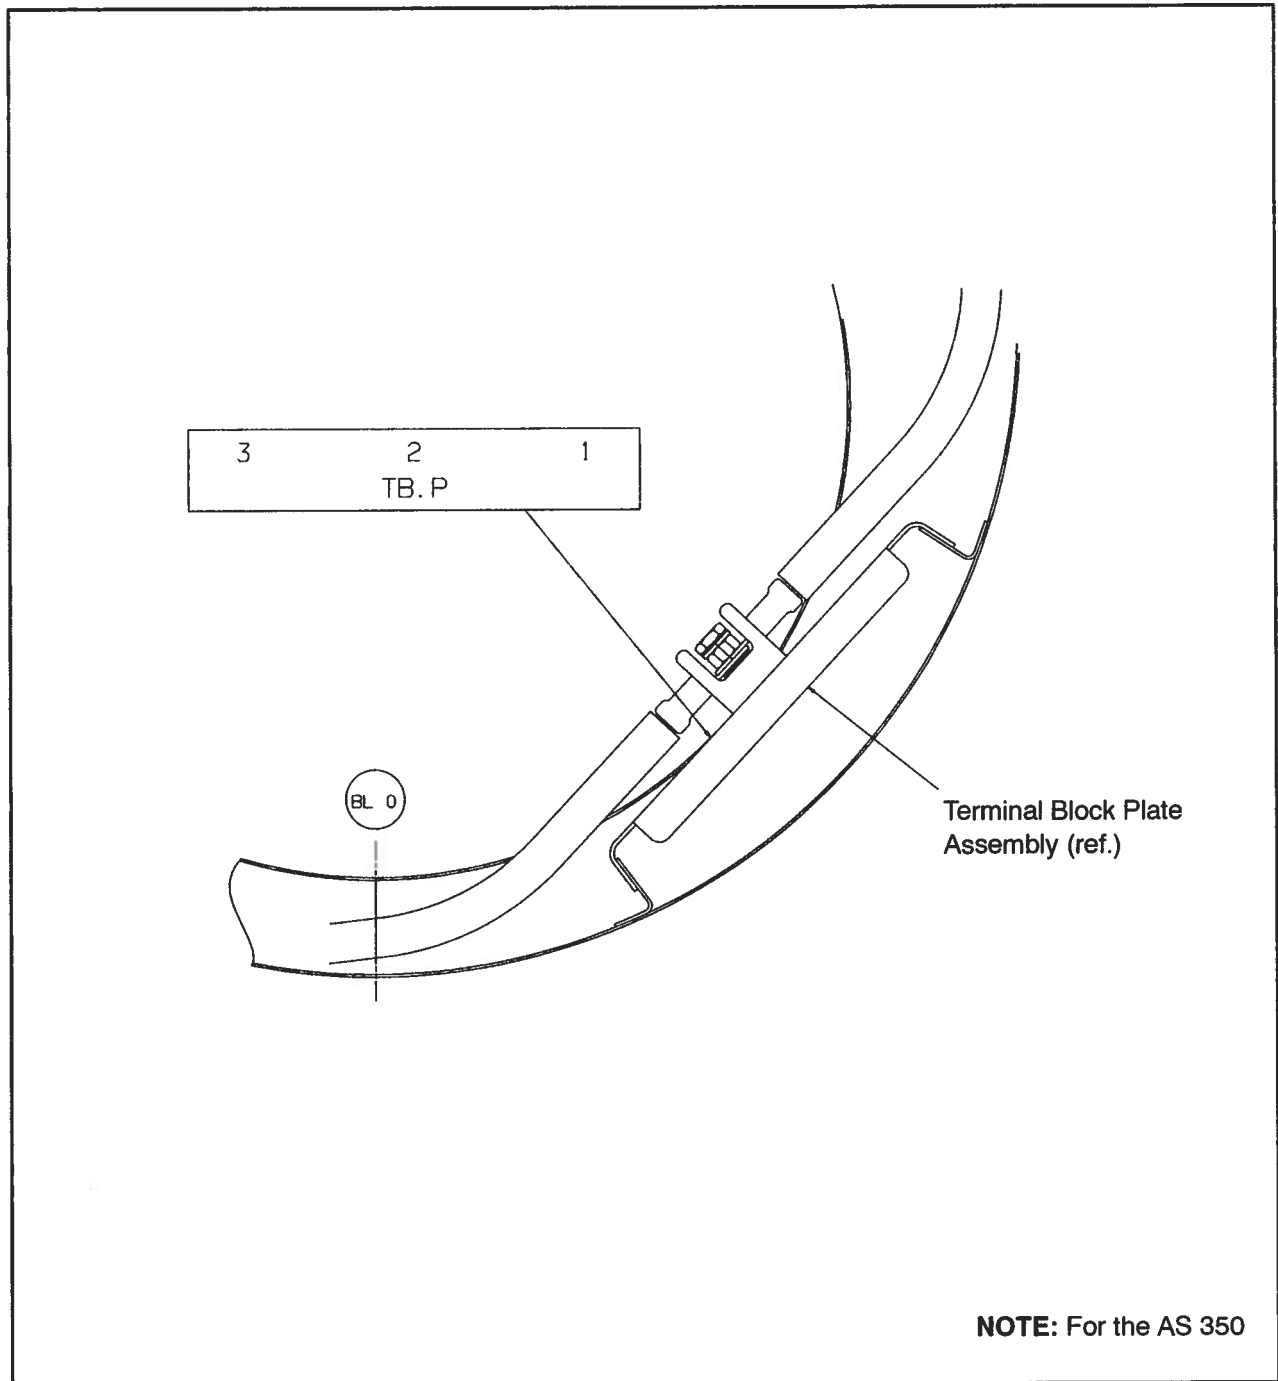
Marking location on AS 350 terminal block plate assembly for the terminal block plate (TB.P) at STN A156 POST AMS 07-3273 and 3274
